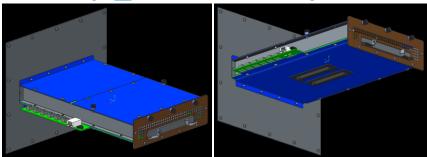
</u>114: SFF Card Thermal Test Fixture PCB
